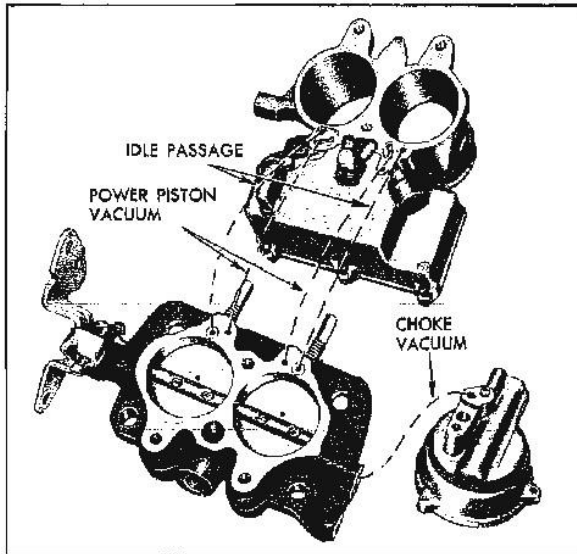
B-53 Passage Identification - Flange - Bowl - Choke Housing
